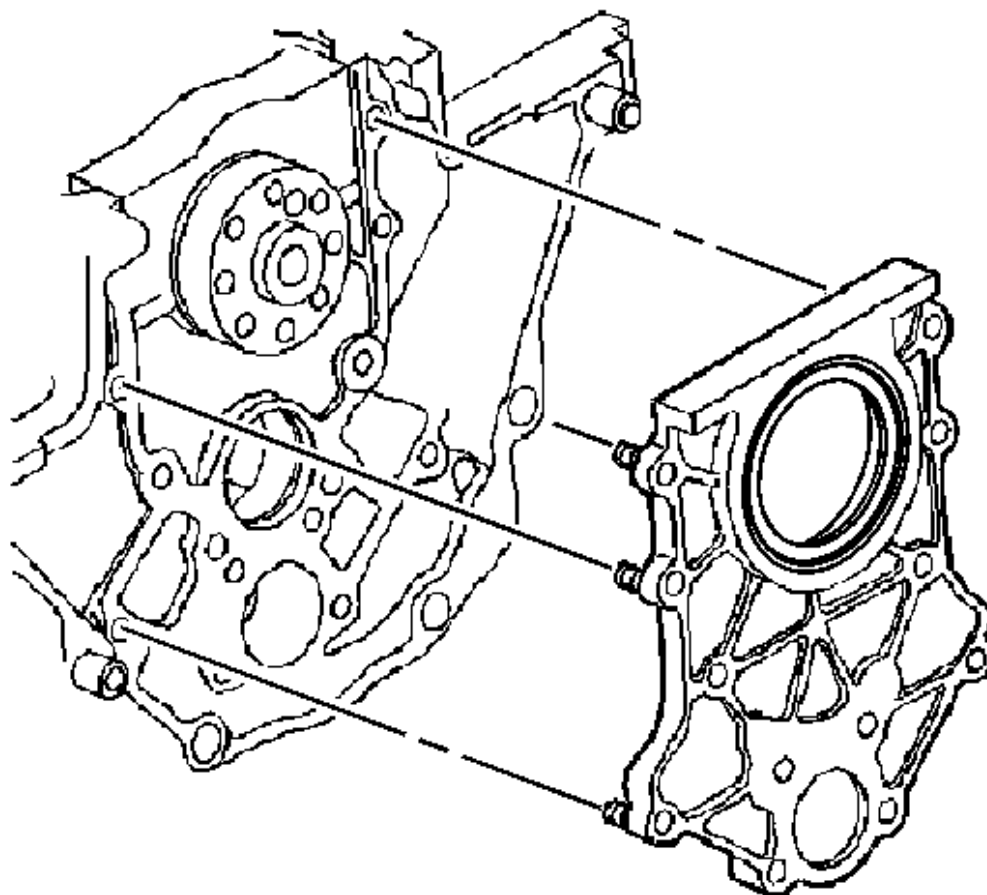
Locating Crankshaft Rear Oil Seal Housing
